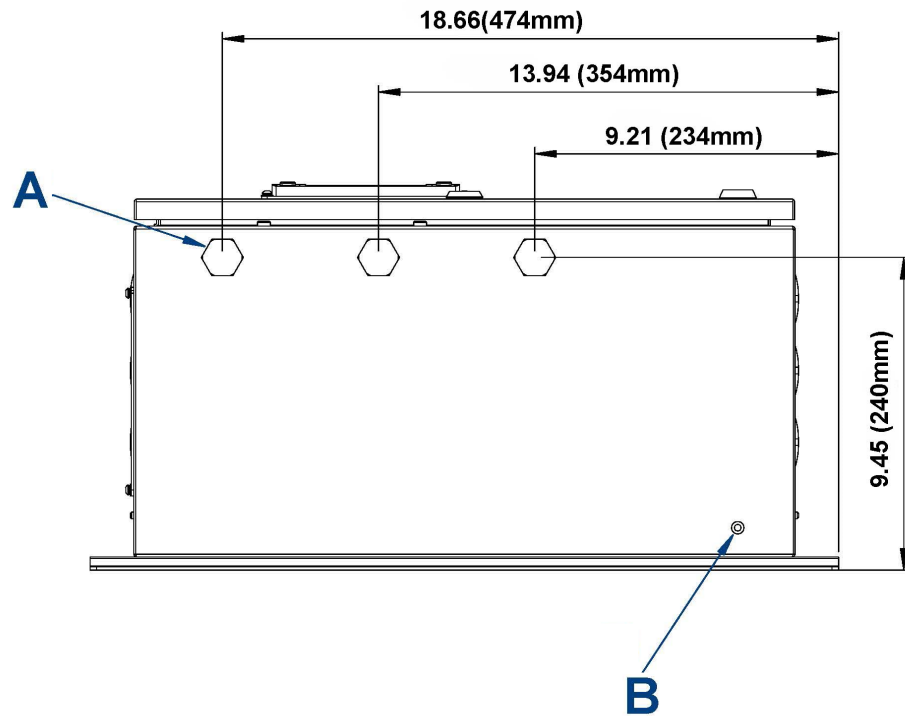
Rosemount CT5100 Dimensions - Top View
